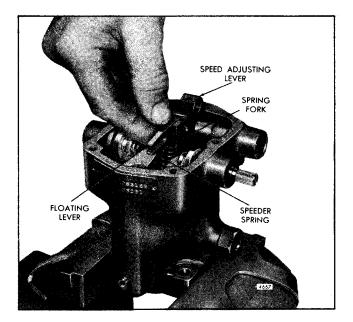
Removing Speed Adjusting Lever, Floating Lever, Spring Fork, Speeder Spring and Pilot Valve Plunger Assembly
